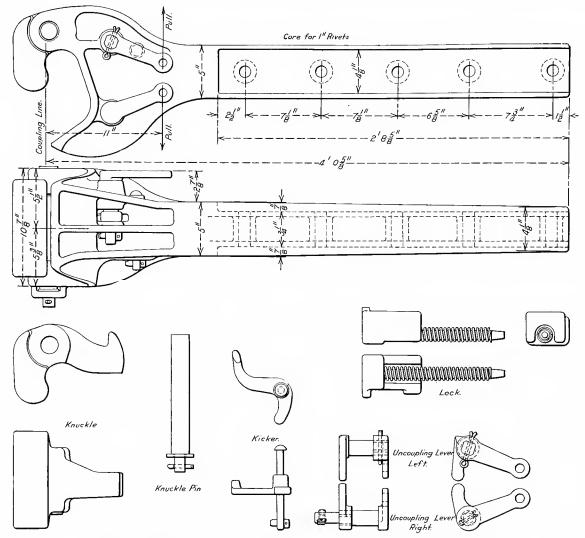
Double Top Operated Passenger Coupler. Gould Coupler Company.
